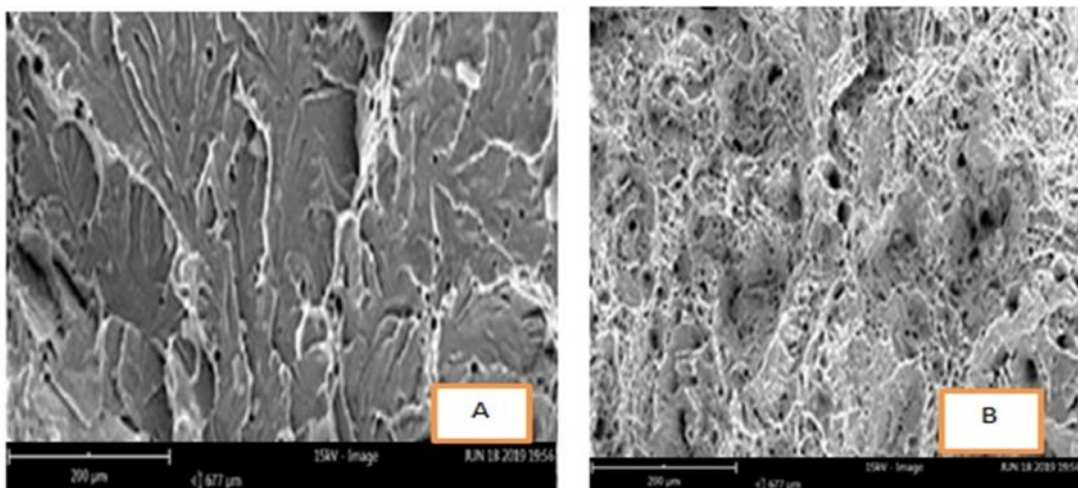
(A) Fractography analysis of the edge of the failed component; (B) fractography analysis of the core of the failed component.
